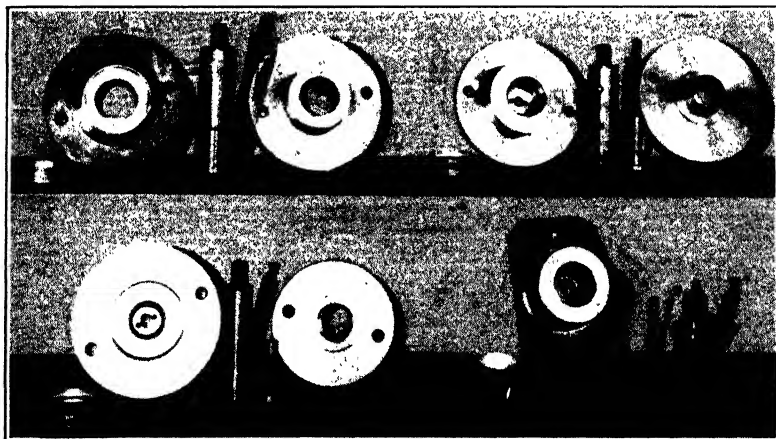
Dies to blank and draw, redraw, redraw and stamp a tapered shell.
